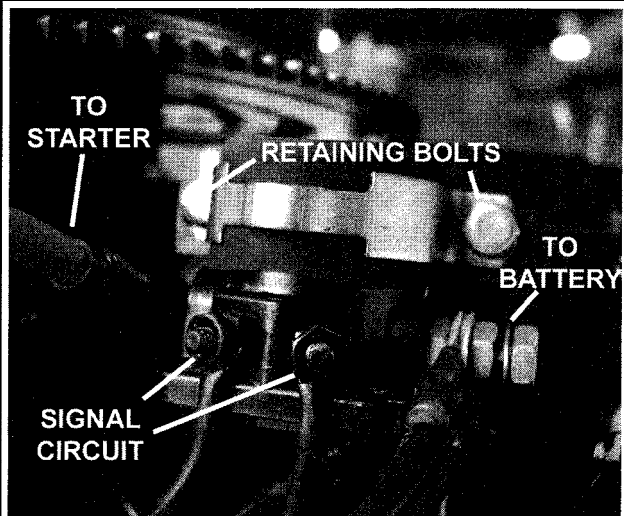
Typical solenoid mounting for carbureted motors V8 shown
